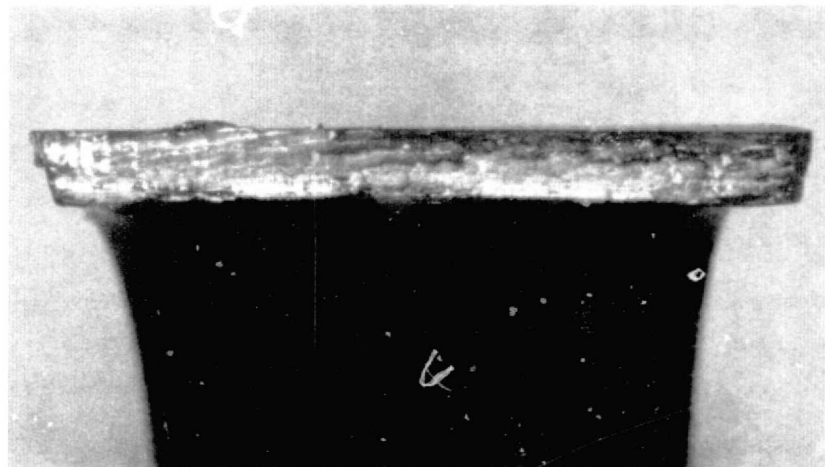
Appearance of Fracture Face of Low Cycle Fatigue Specimen. (Four Layer Deposits on Specimen ID, Note Brittle Appearance of Zr-Cu Deposit)
